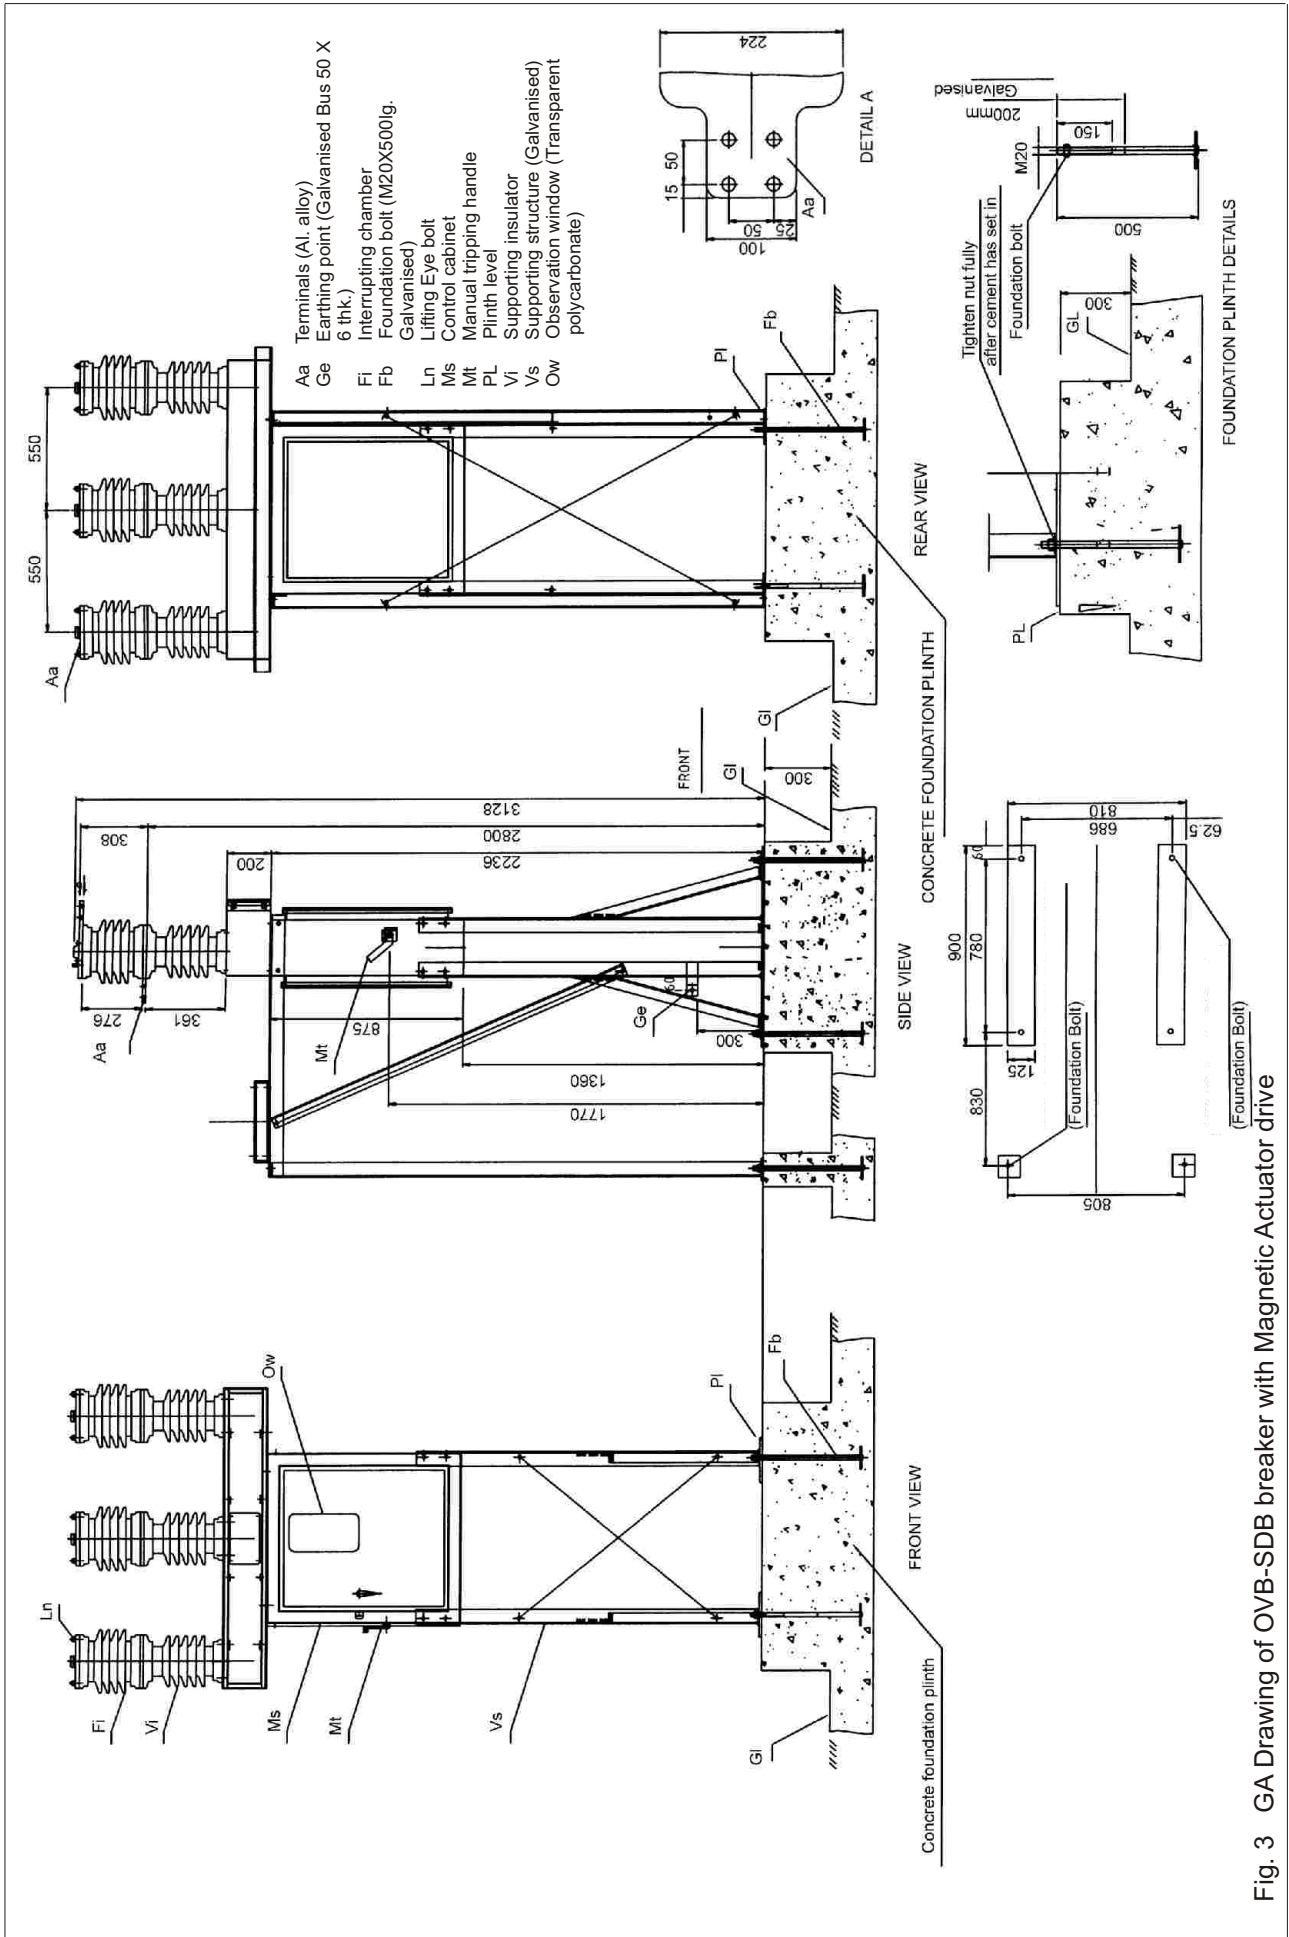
GA Drawing of OVB-SDB breaker with Magnetic Actuator drive
